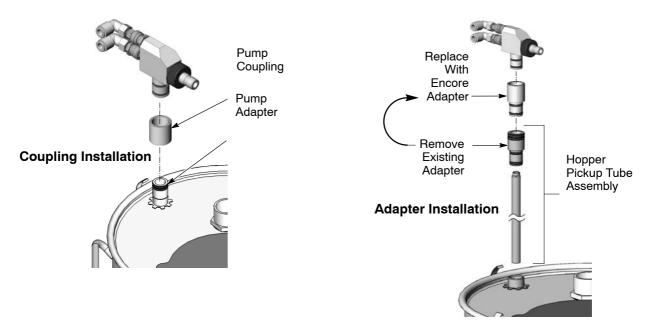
Pump Mounting with Adapter Kit or Coupling on HR or NHR Hoppers
